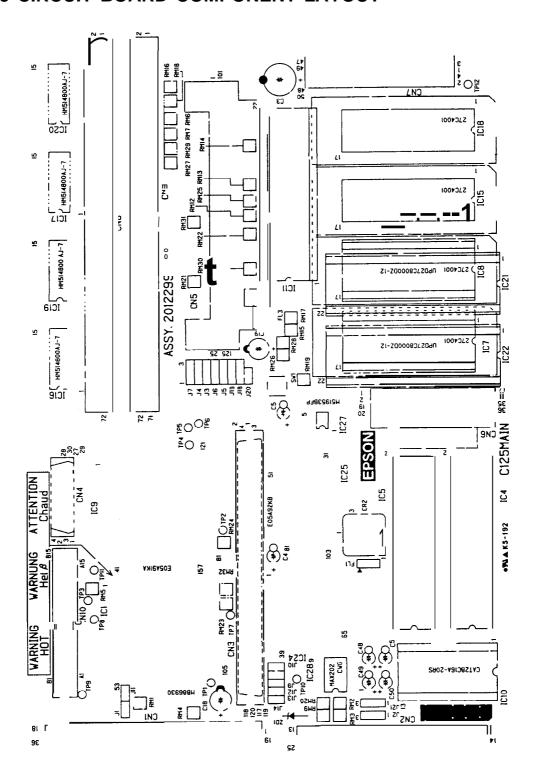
C125 MAIN Board Component Layout (Front Side)
